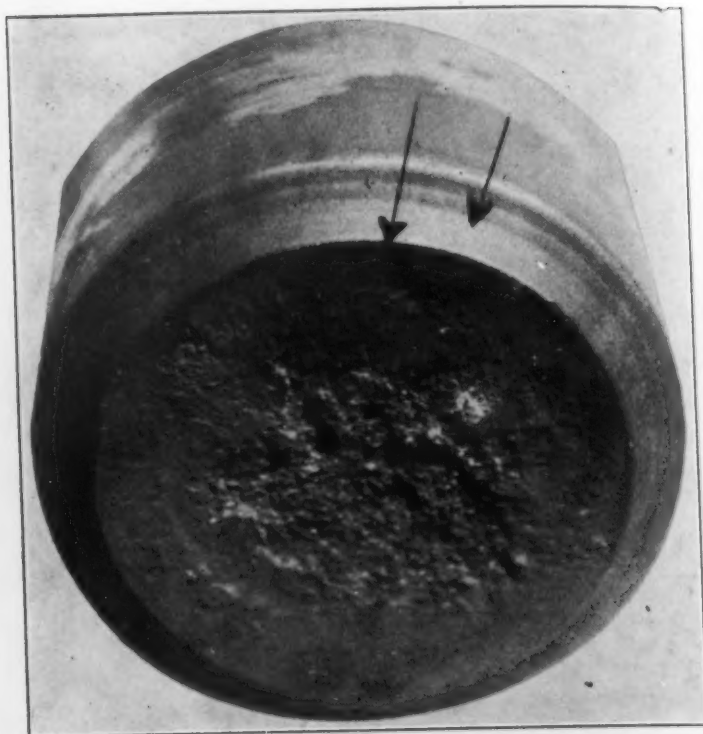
Broken 6-inch Axle. Rough Tooling.
